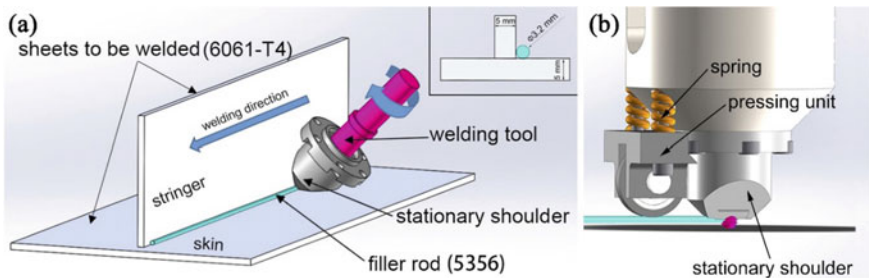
Schematics: a welding process and b tool package for an additive T joint [26]
